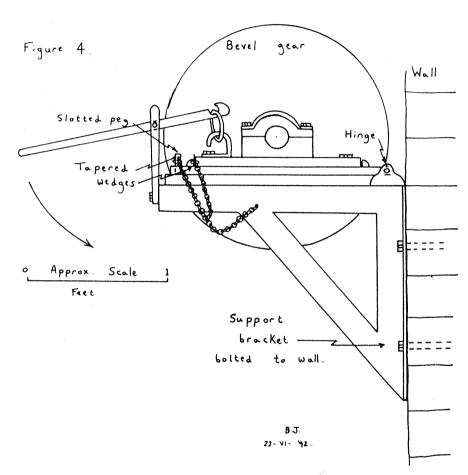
Method of Disengaging the Bevel Gear Drive, (Elevation on A).
